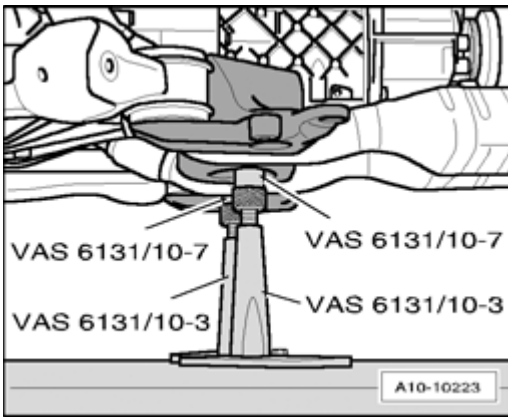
Positioning Support Elements From VAS 6131/10 At Left/Right On Tunnel Cross Member
